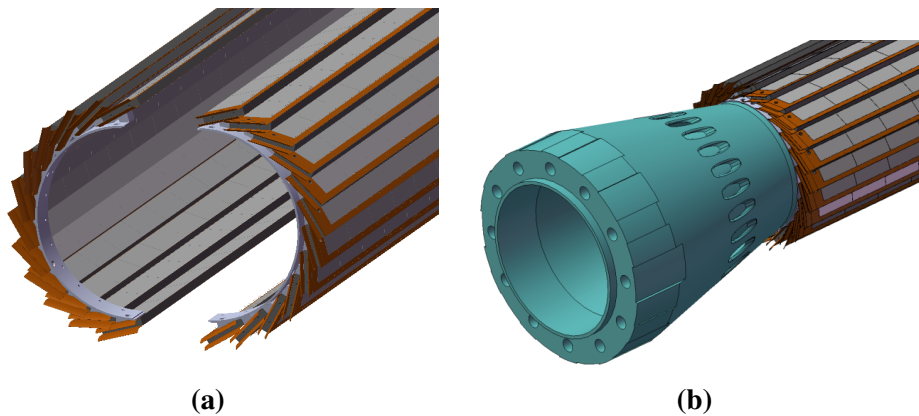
(a) The barrel assembly. (b) The barrel on beam pipe assembly (the outer tube of the beam pipe assembly is not shown)
